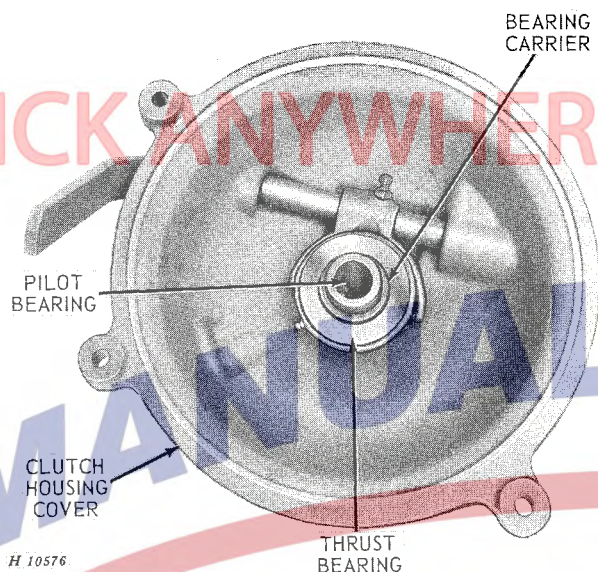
Clutch Housing Cover with Bearing and Carrier
